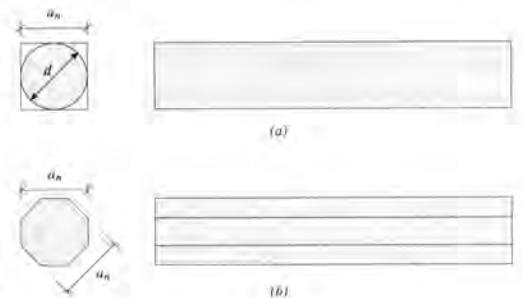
MACHINE-CUT PEG FABRICATION,
